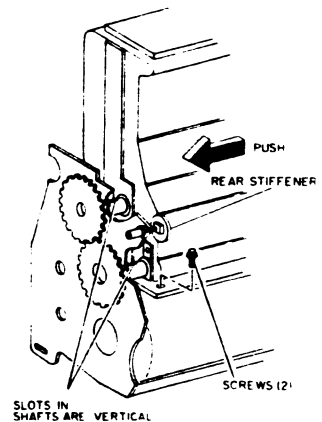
Aligning the Dispenser Assembly with Developer Assembly
